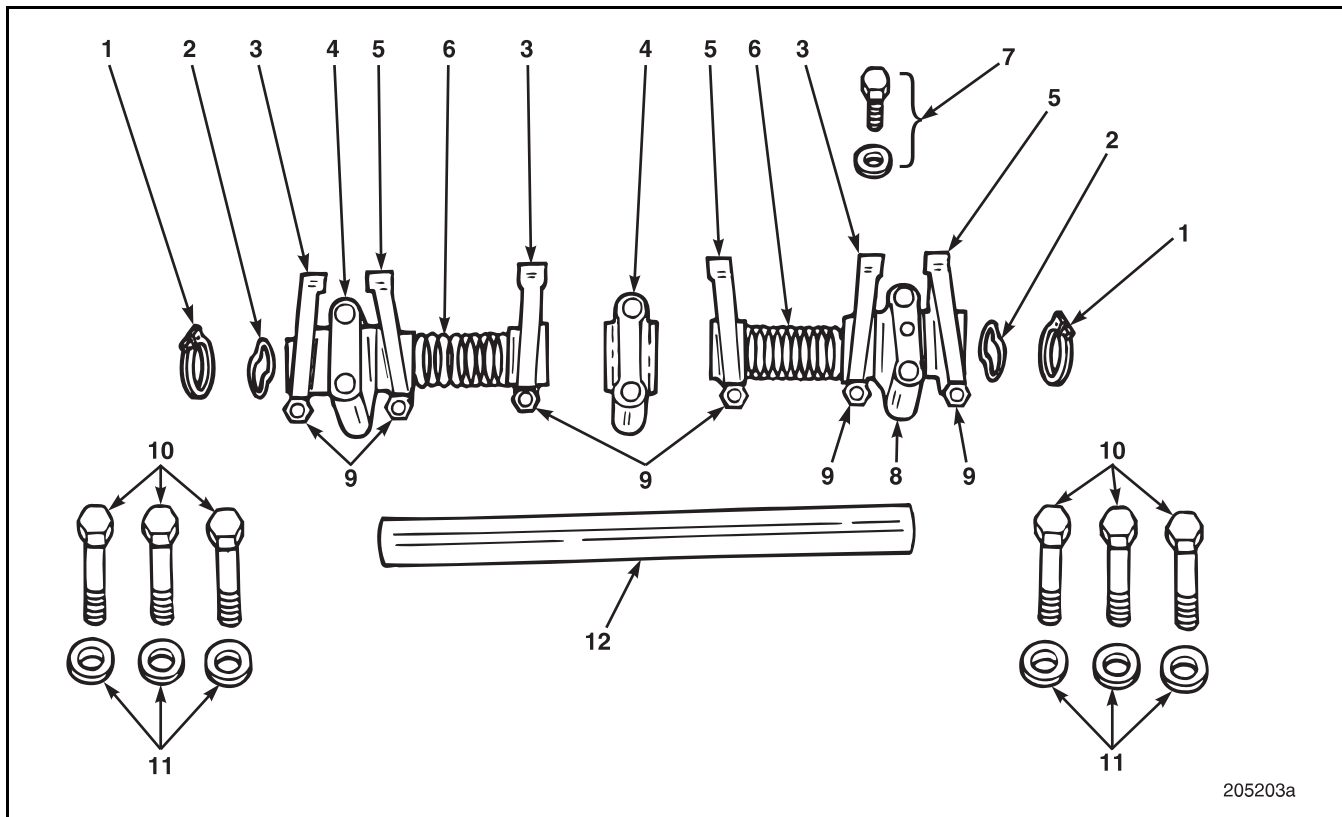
Valve Rocker Arm Shaft Assembly (Without Engine Brake)
